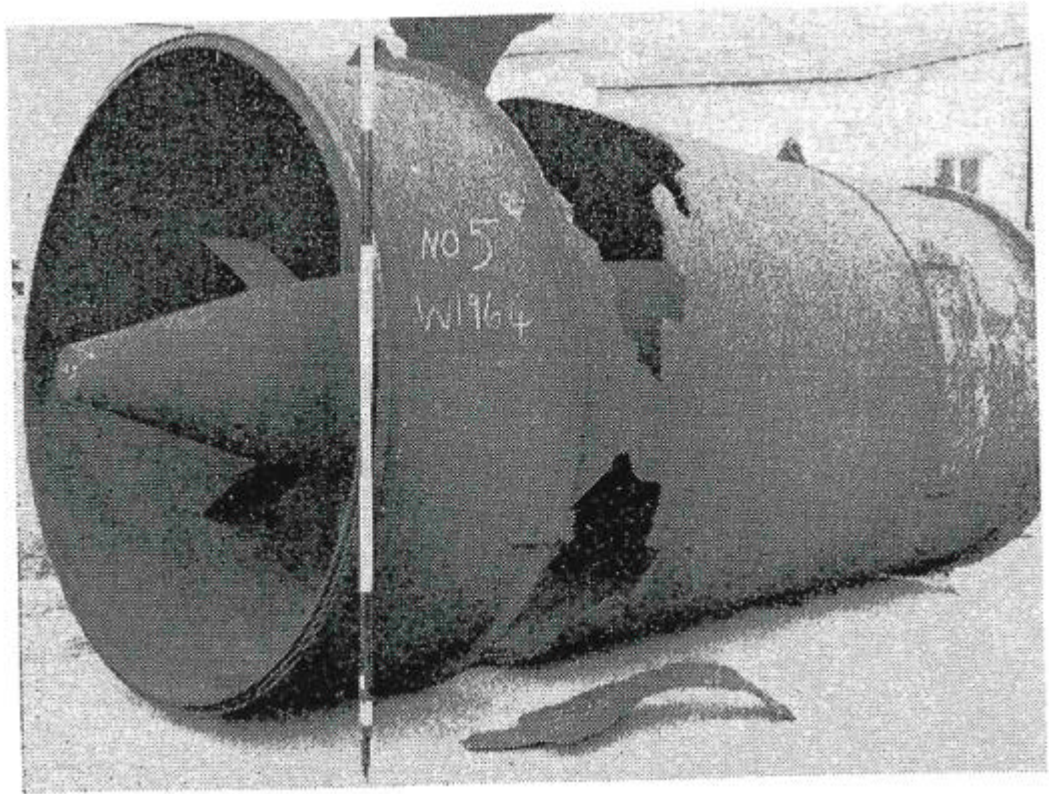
Fatigue cracking on bullet section of Magnox gas circulator
